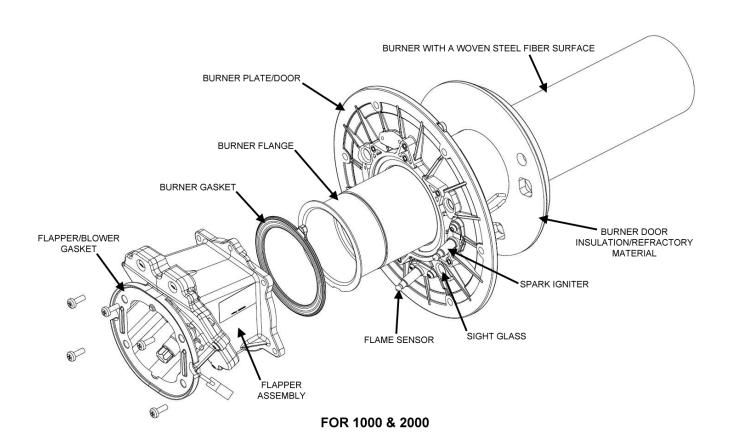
BURNER ASSEMBLY (1000/2000)
